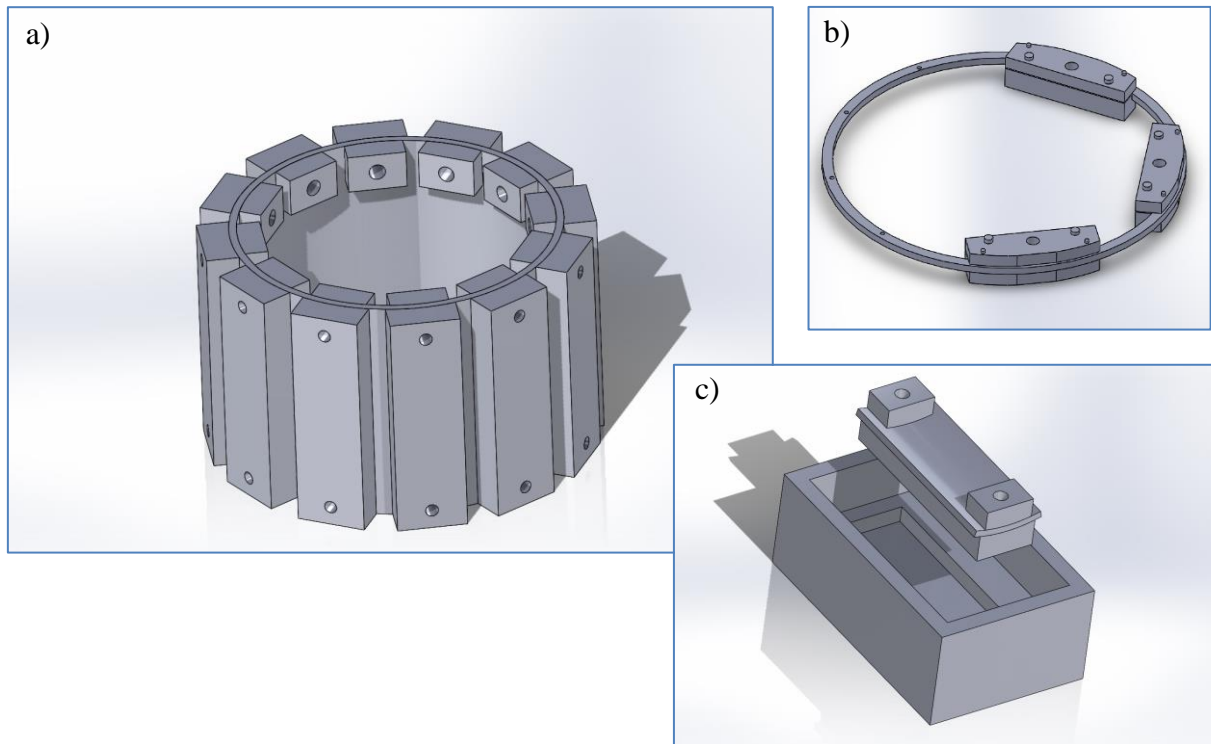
a) Cylinder and b) piston ring fixturing arrangements and c) segmented separation for laser texturing and lubricant tub tribology testing.
